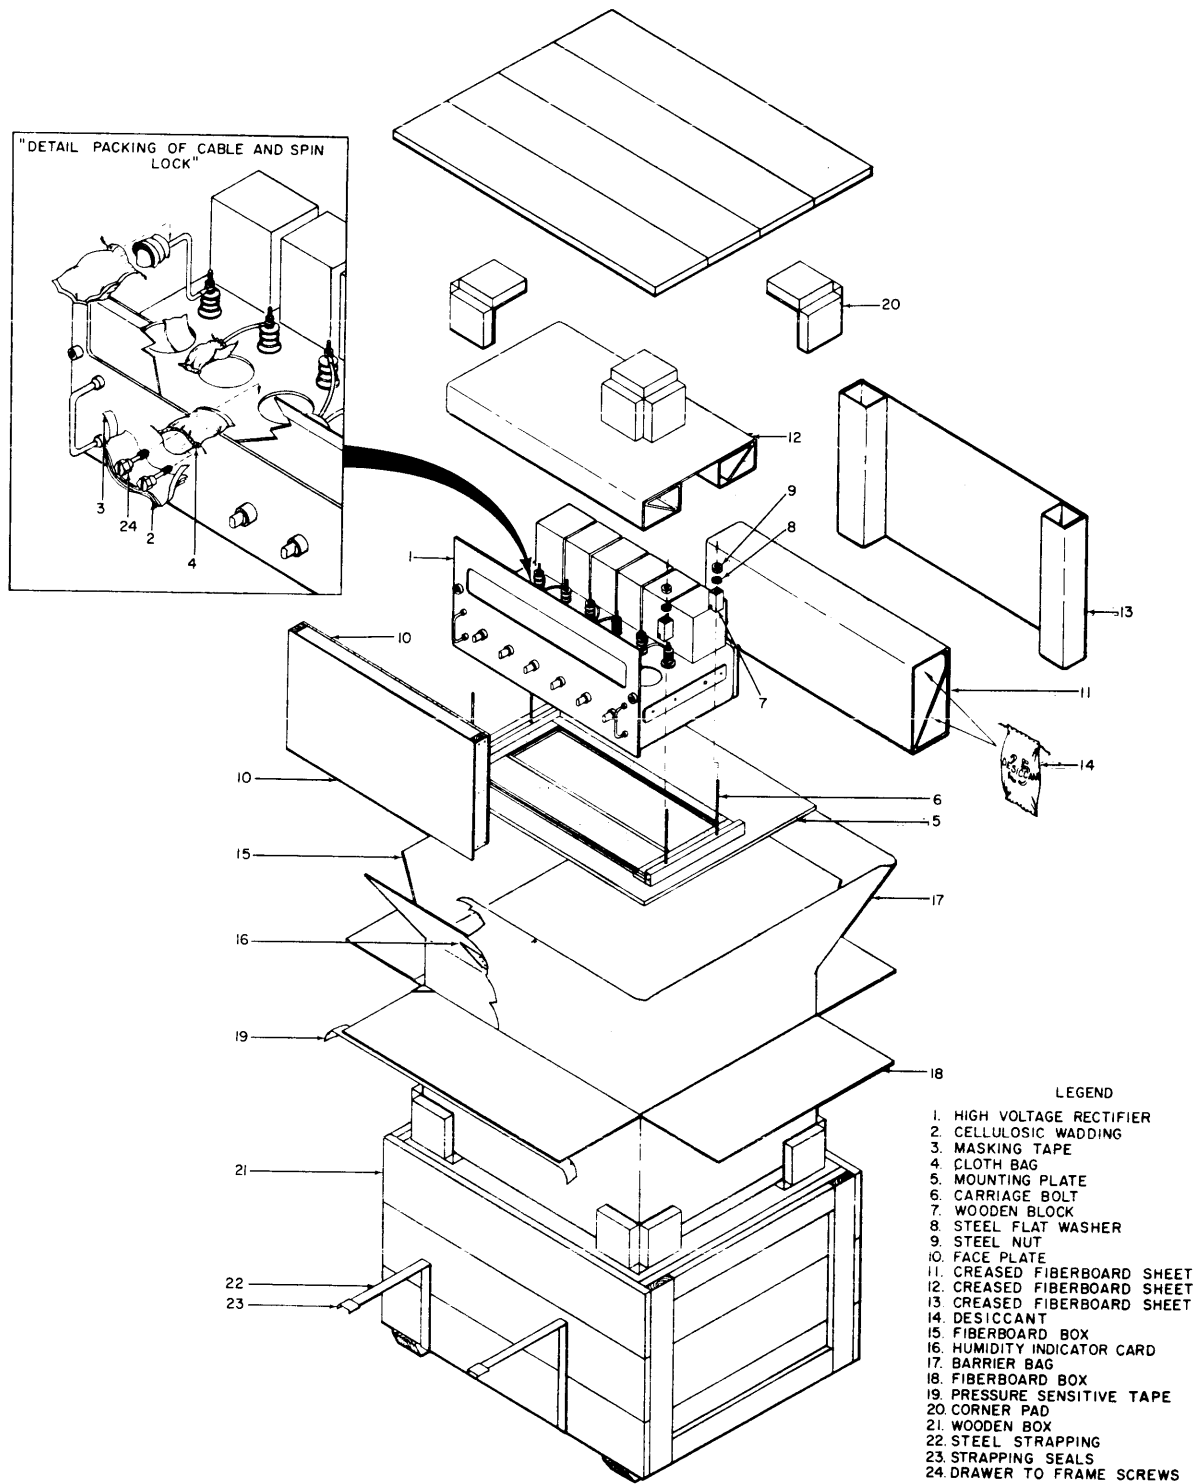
Typical Equipment Packaging (Sheet 2 of 3)
